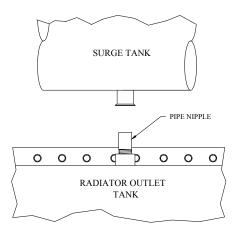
A - INSTALL PIPE NIPPLE INTO RADIATOR OUTLET TANK AND TIGHTEN SECURELY.
